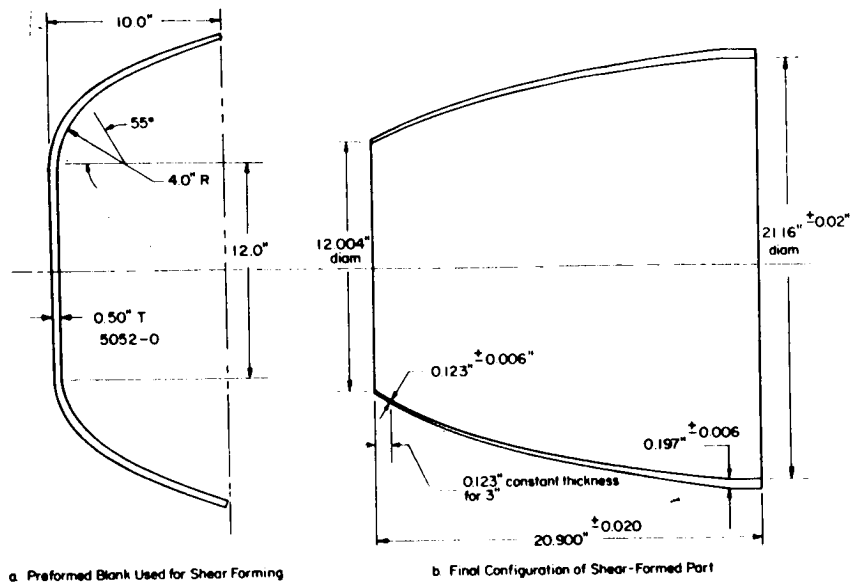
SHEAR-FORMED, VARIABLE-WALL CONE MADE FROM A 45-INCH-DIAMETER, 0.50-INCH-THICK ALUMINUM BLANK, PREFORMED TO DISH SHAPE ON A HYDRAULIC PRESS (REF. 59)
